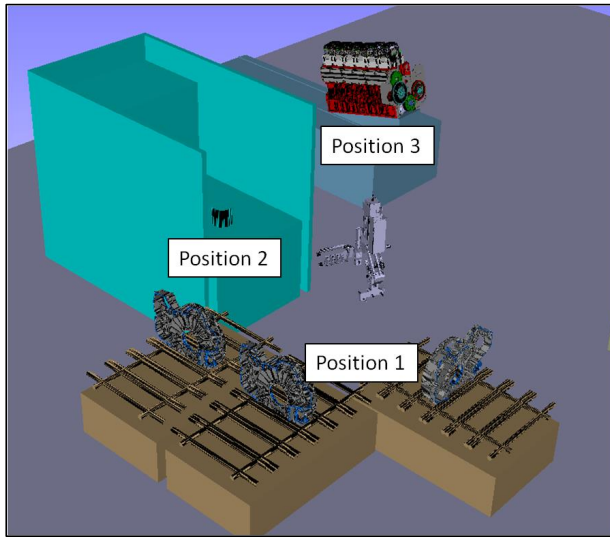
Existing flywheel cover assembly station, with lifting equipment and the product flow of flywheel cover in station (from positions 1 to 3) (Paper A).
